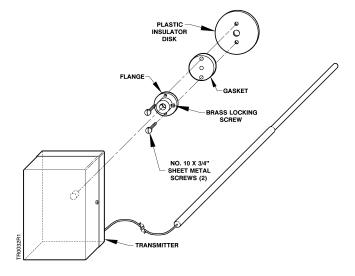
Mounting the Remote Bulb Transmitter to a Duct.
